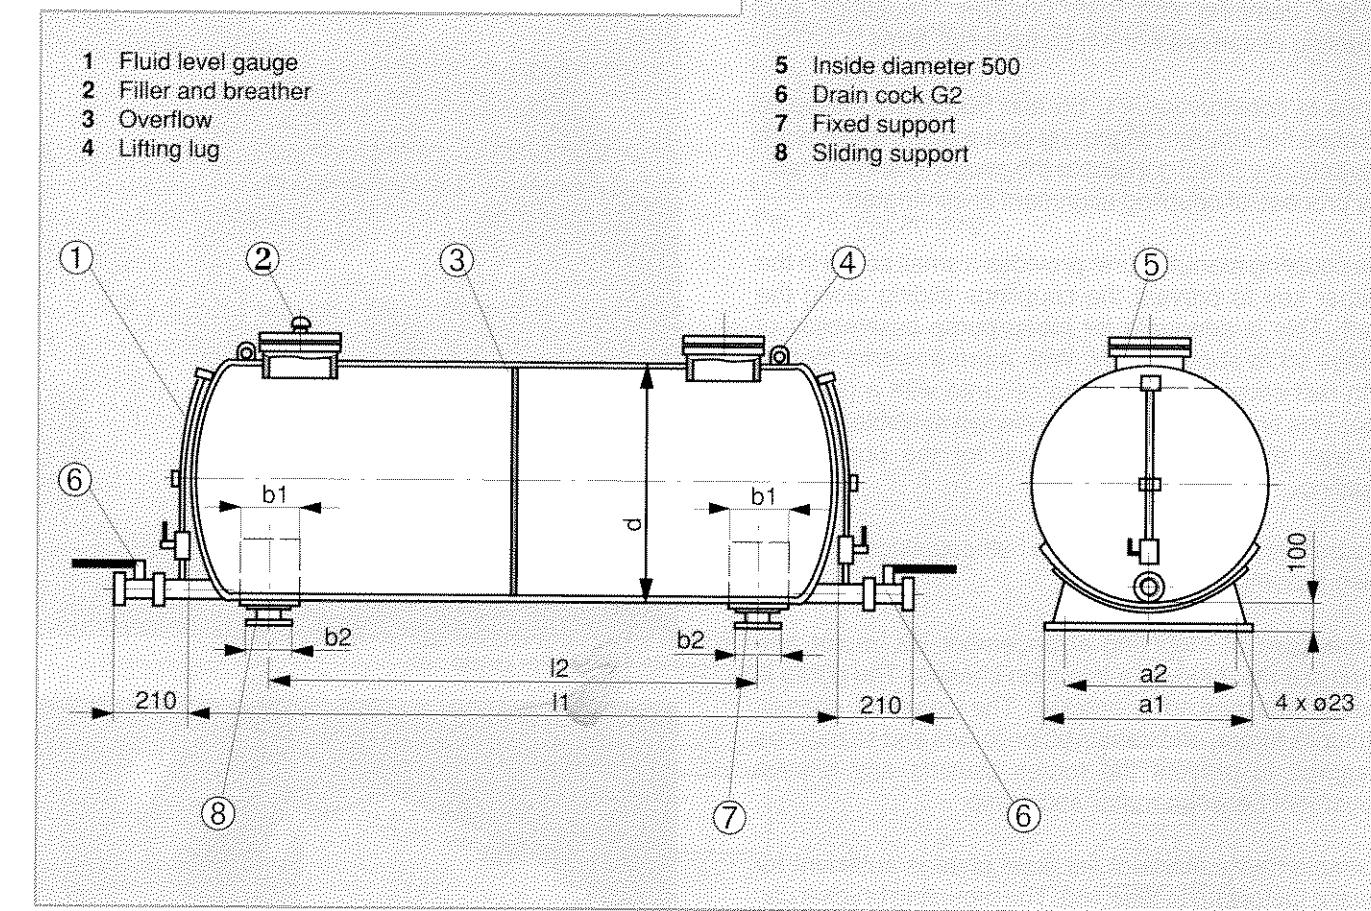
Principal dimensions of steel cylindrical fluid tanks
